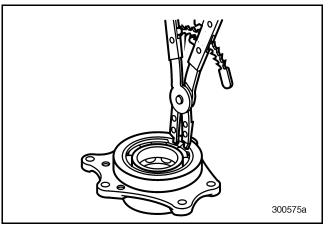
Removing Snap Ring from Rear Mainshaft Bearing Cover
